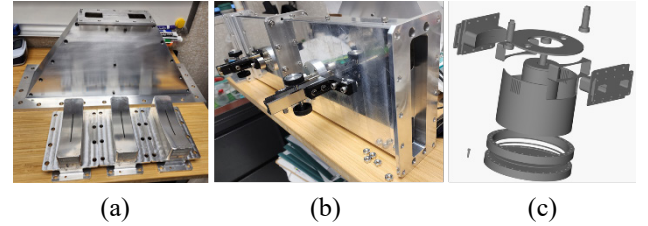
Fabrication status: aluminium cold model iris and waveguide taper sections (a), prototype bench test of iris cold model assembly with iris-to-coax transition (b), and exploded view of iris test cavity mechanical design (c).
